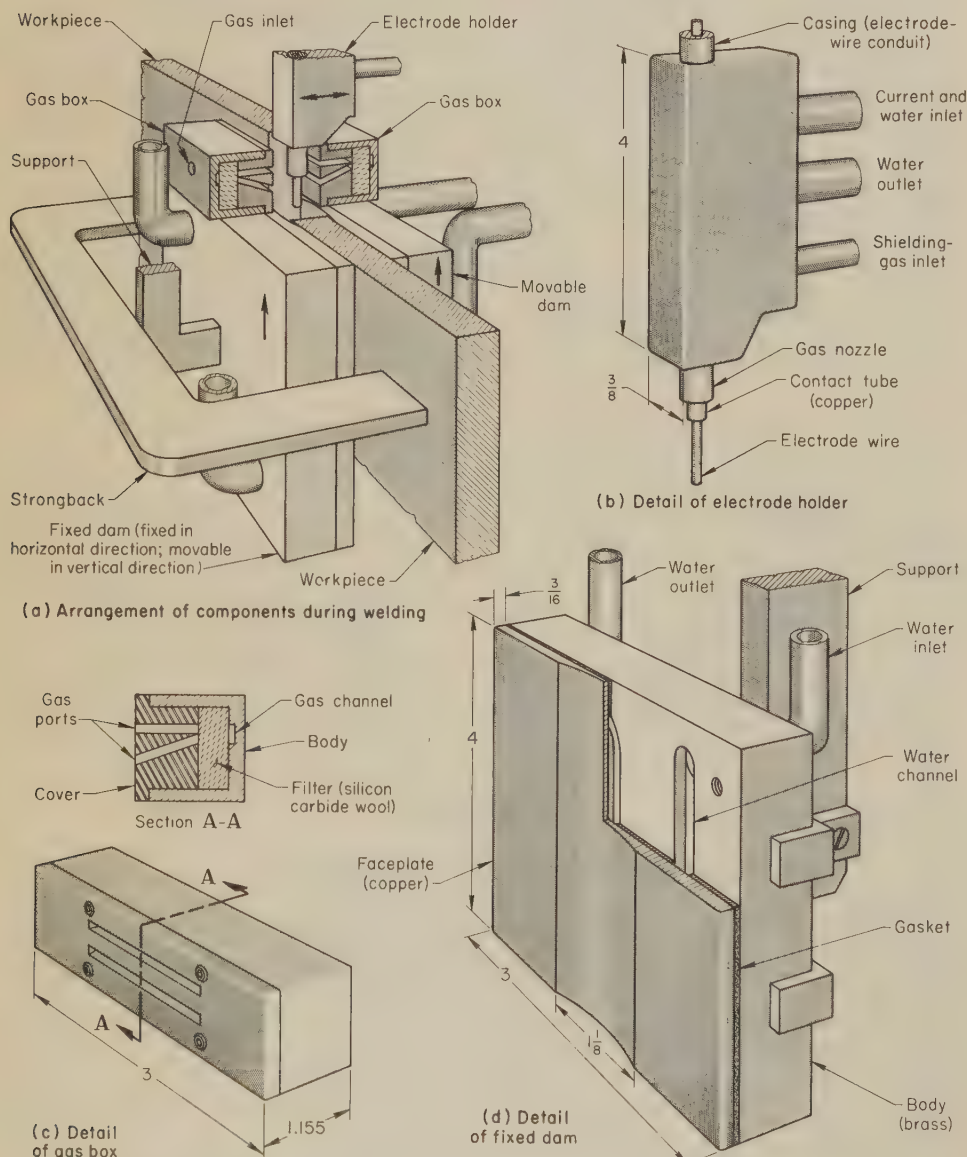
Arrangement and details of essential components of an electrogas welding system employing a water-cooled electrode holder and separate gas boxes
